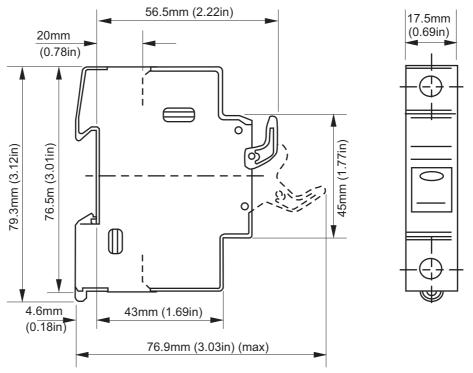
Fuse holder dimensions: CUS101 (10x38mm)
